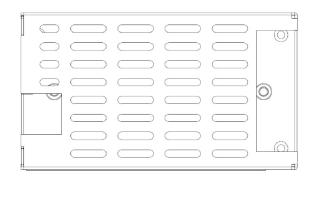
Mechanical Drawing - Option 2 (Output Connector - Header Molex)
